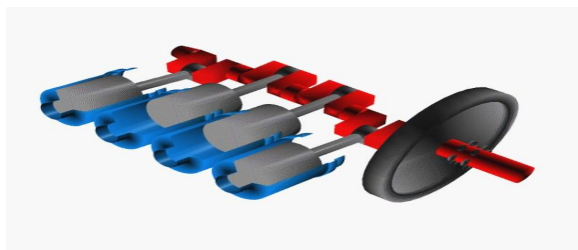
Inline cylinder piston arrangement to crank shaft
